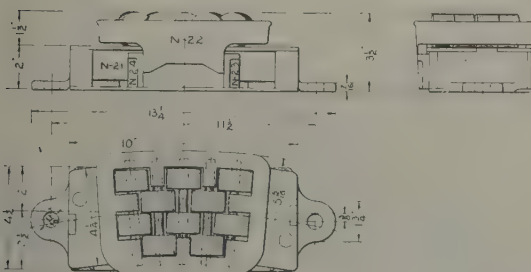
Creco Roller Side Bearing No. 4-A for Four-Wheel Passenger Train Car Trucks.
